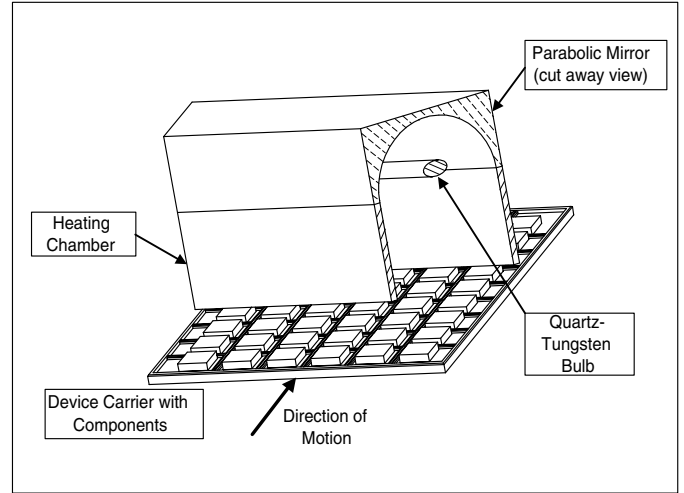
ISOMETRIC VIEW OF IR CHAMBER.
